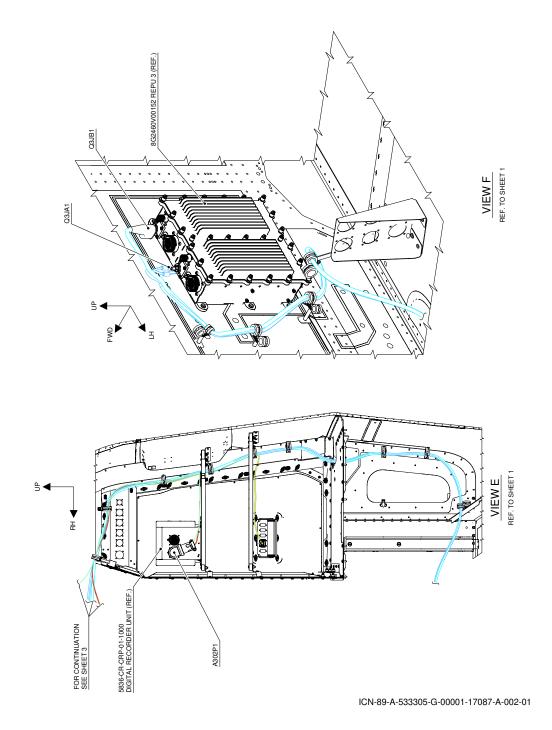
(Sheet 4 of 7) Left BL 550 aft longeron - Electrical parts
